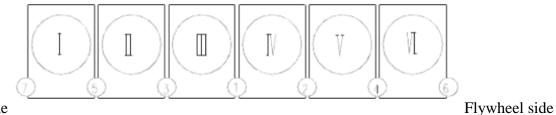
Assembly of cylinder cover auxiliary nuts and clamp blocks
